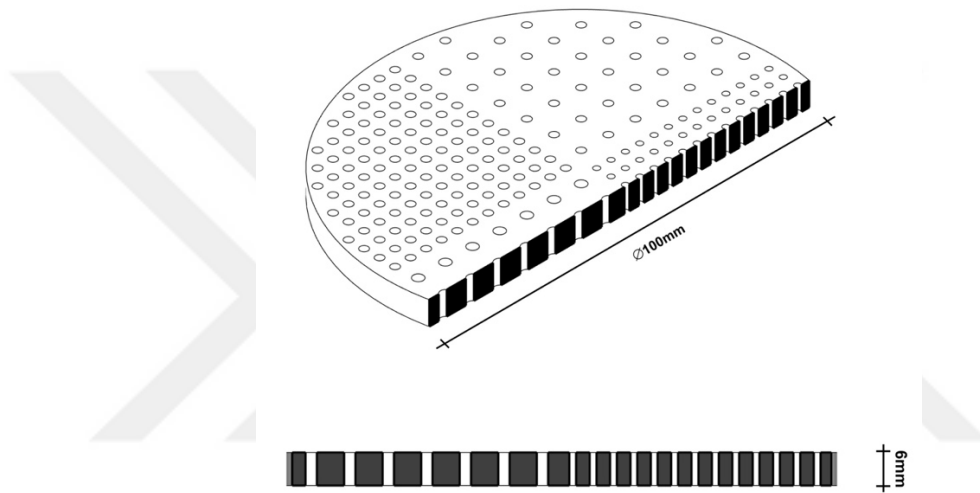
Cross-sectional isometric view (Top); Cross-sectional view in right-side view of the sample drawing (Bottom)
